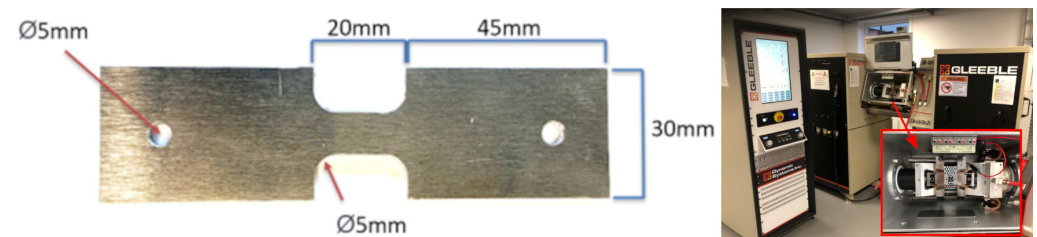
Sample geometry used for Gleeble thermomechanical processing, and Gleeble 3800 test machine (Gleeble, Poestenkill, NY, USA).
